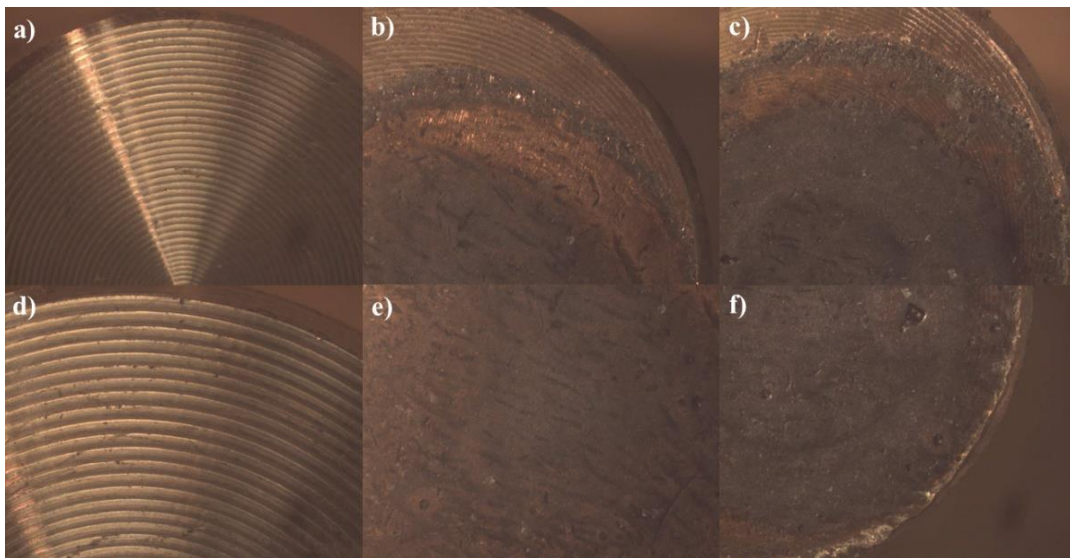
Electrode's Wear Study: Top Electrode Macrographs: a) and d) 0 welds; b) and e) 2500 welds; c) and f) 5000 welds.
